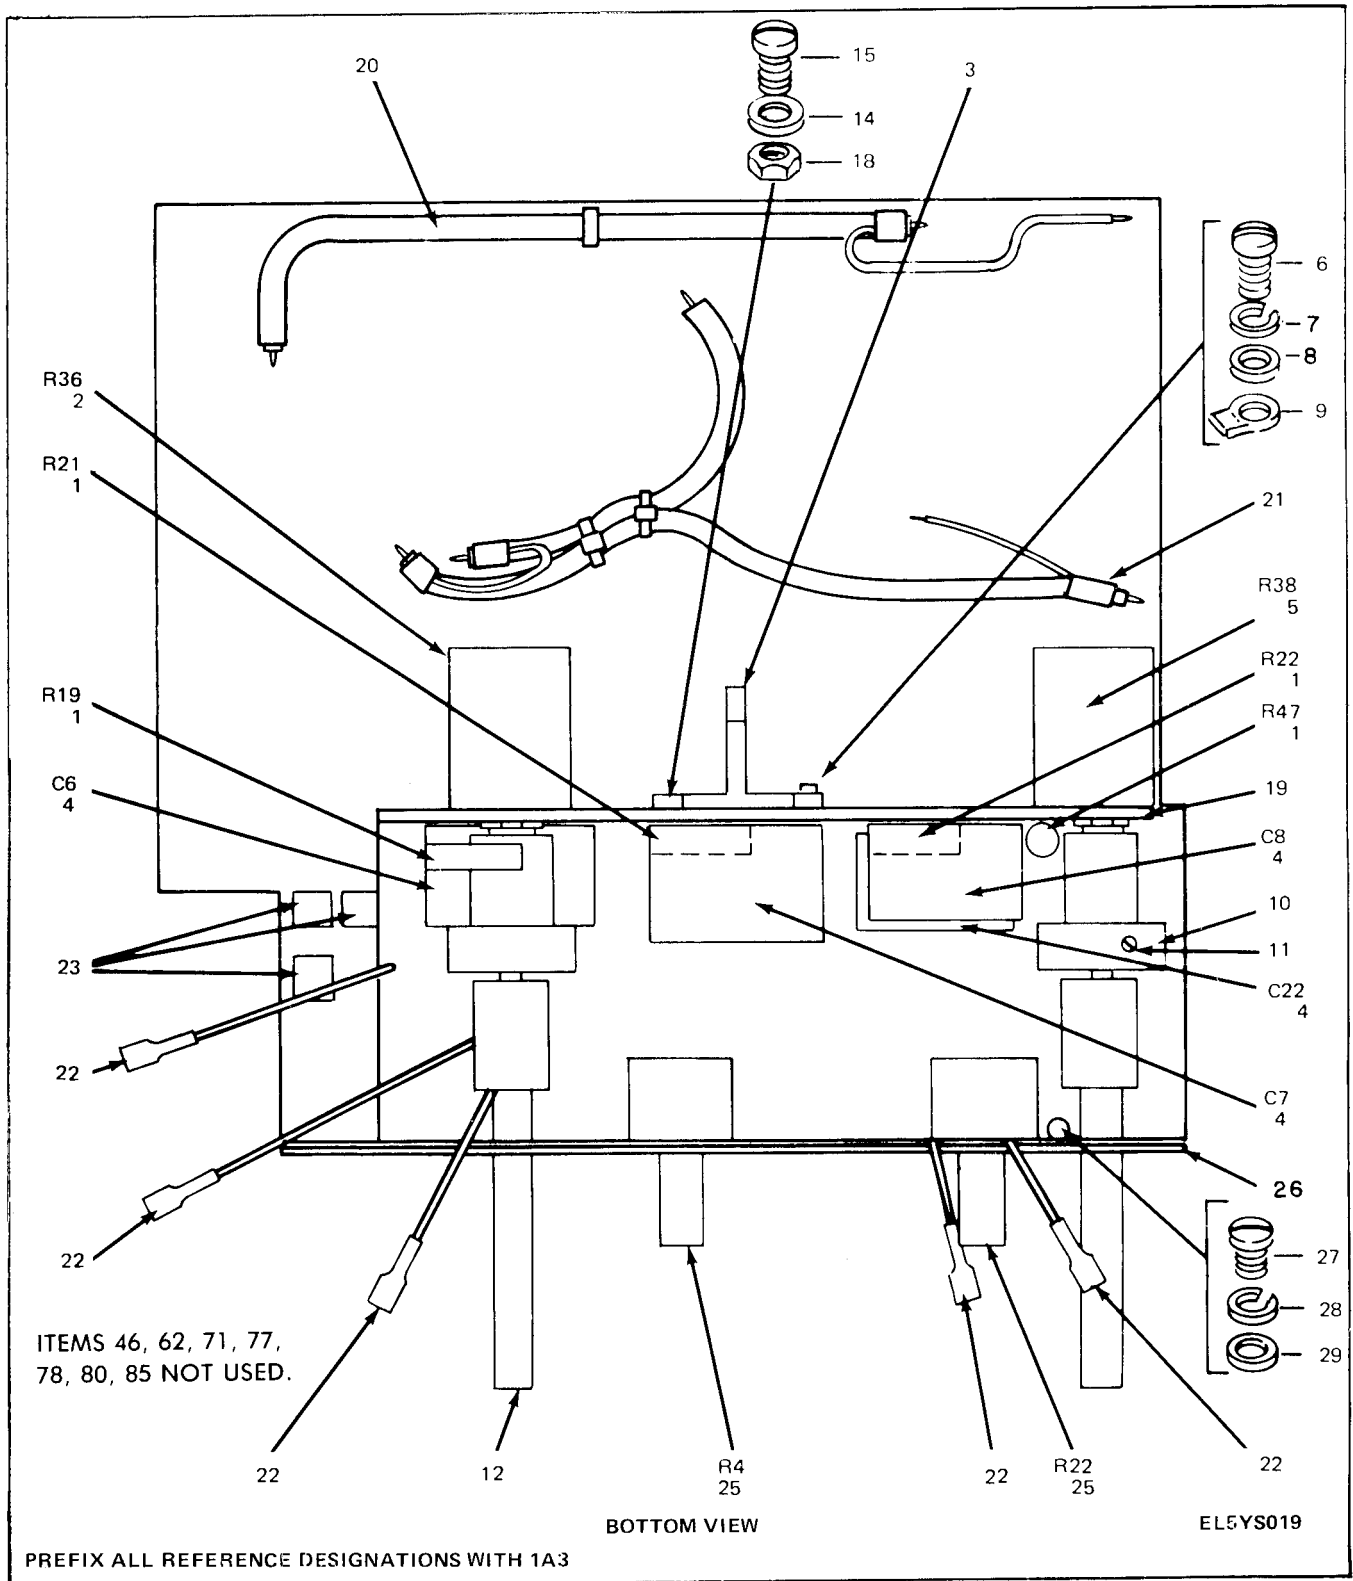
A. Pushbutton Board Assembly, B161606-2, Serial No. 5-201B Through 5-511B.
